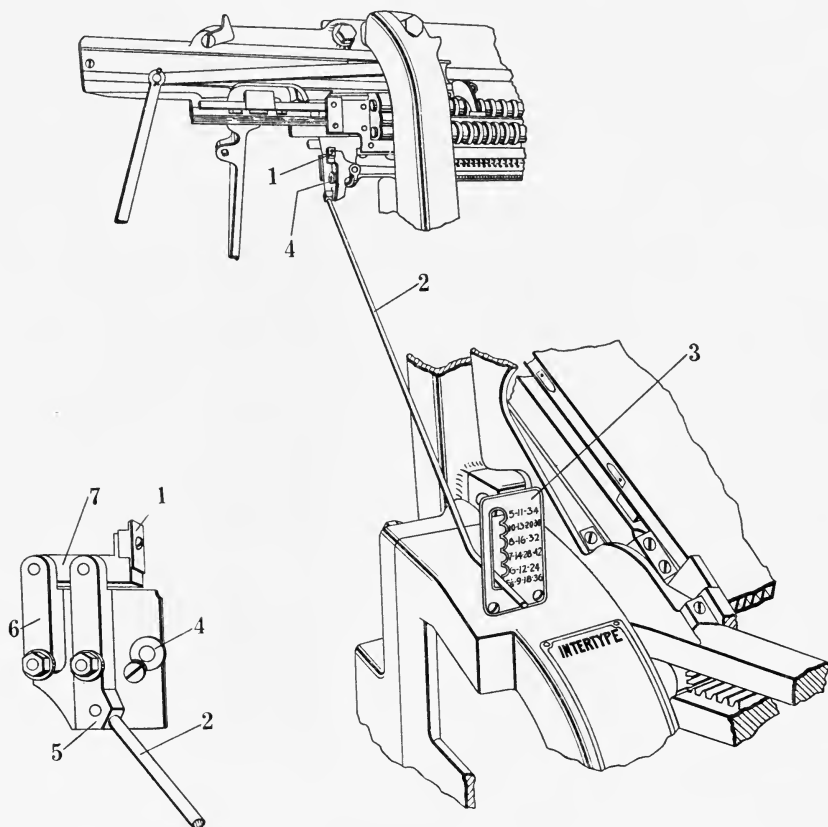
View of the Font Distinguisher employed on single distributor Intertypes. Wrong fonts are easily accessible for removal. The distinguisher setting is governed by the position of the rod 2 which engages one of the notches in the index plate 3.
